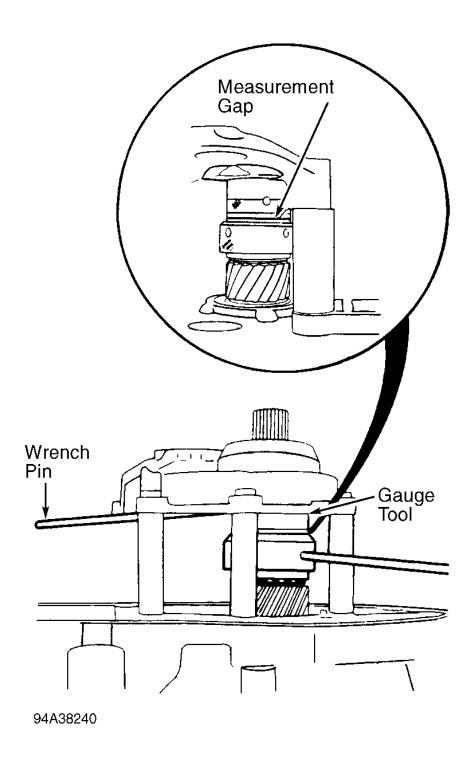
Measuring Output Shaft Bearing Preload Courtesy of FORD MOTOR CO.
